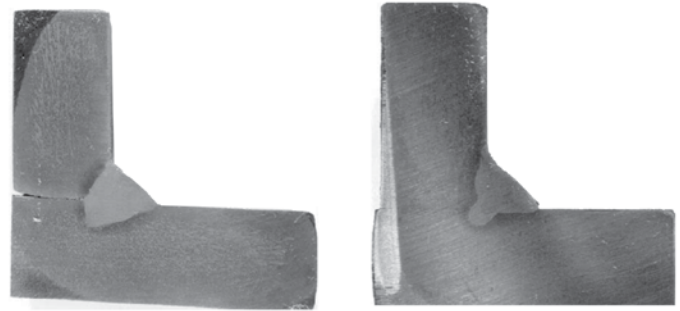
Nugget profiles for metal cored wire (left) and solid wire gas metal arc welds.
